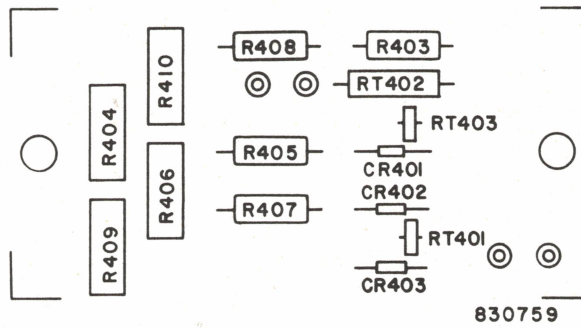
Meter Assembly, Parts-Location Diagram (B830759B)
